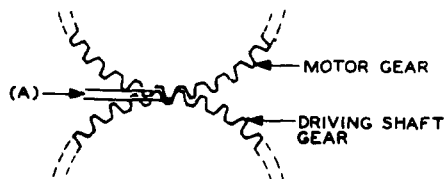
Engagement of Motor and Driving Shaft Gears
